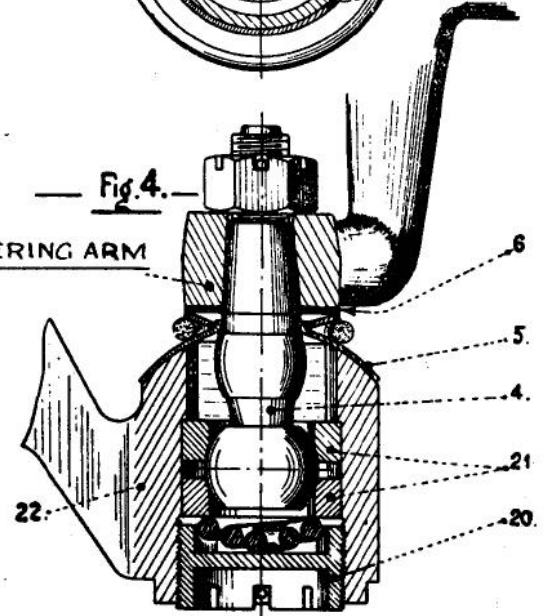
ASSEMBLY OF BALL PINS AT TRACK ROD END
